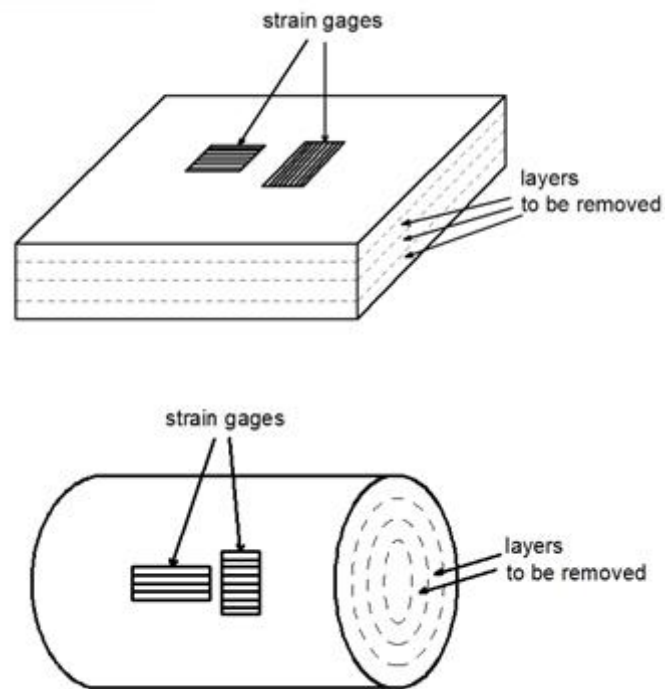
Layer removal from a rectangular component (above) Layer removal from a cylindrical component (below) (Treuting and Read, 1951).
